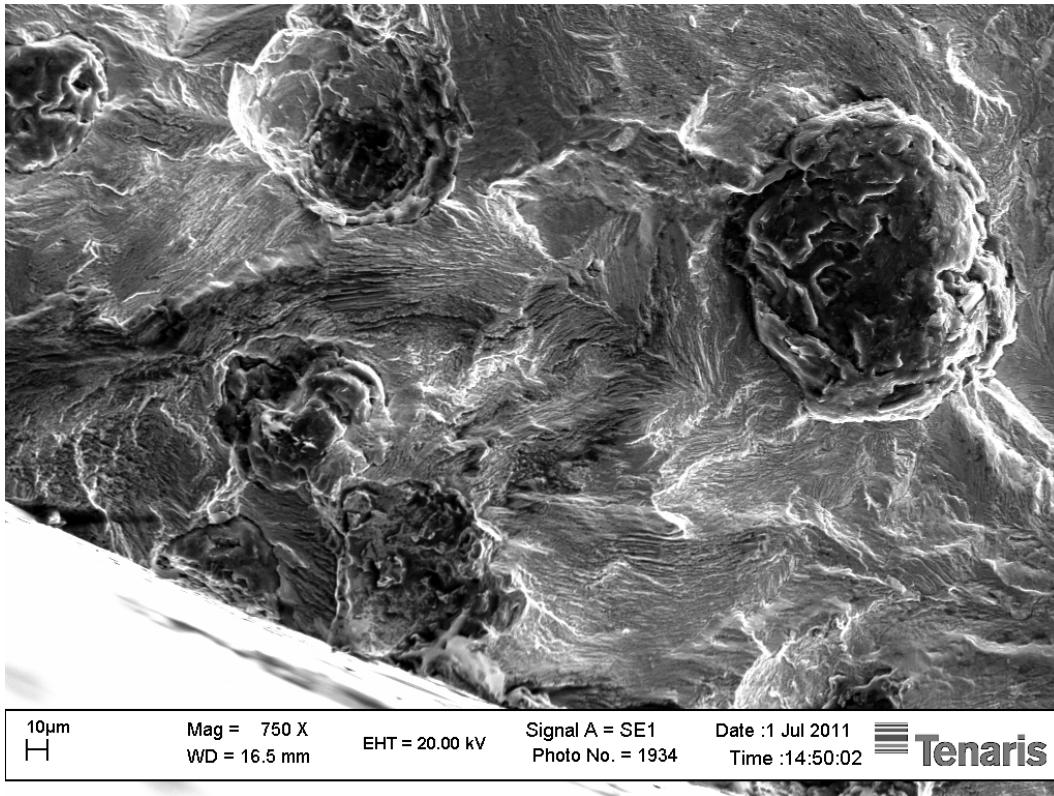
Fatigue zone in detail (Specimen 4)
